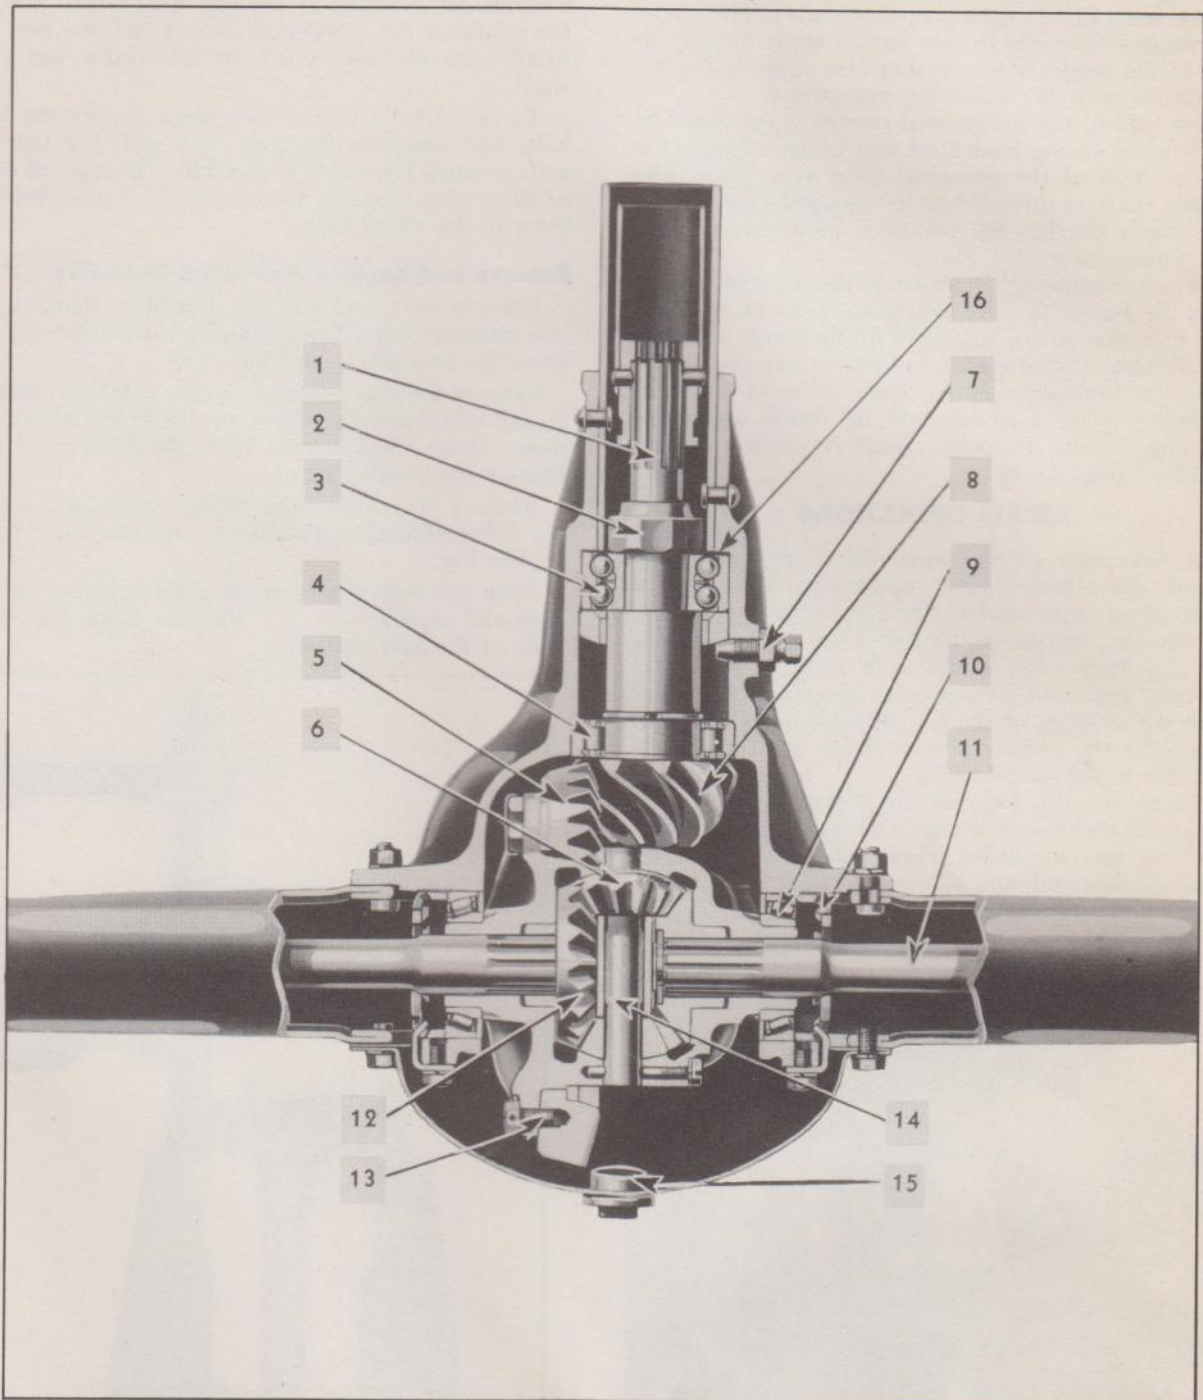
Rear Axle Assembly 1/2-Ton Truck
